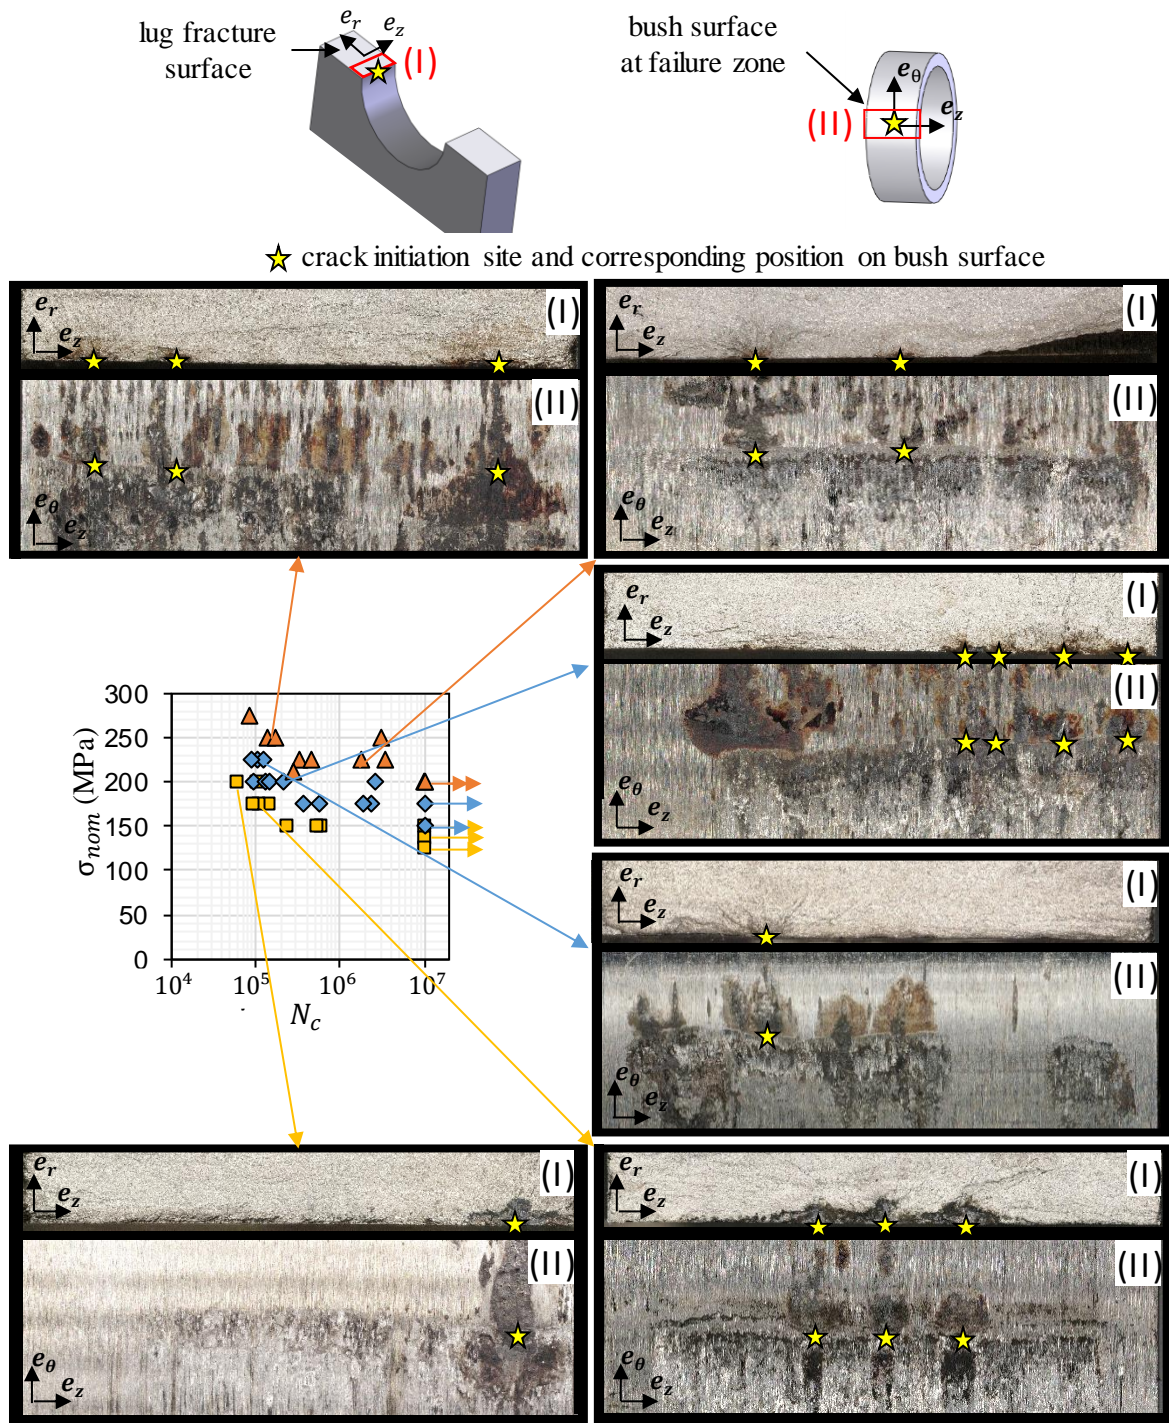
Optical observation of the fracture surfaces and bushes surfaces at the corresponding failure zone for several broken specimens. The crack initiation sites are indicated by yellow stars.
